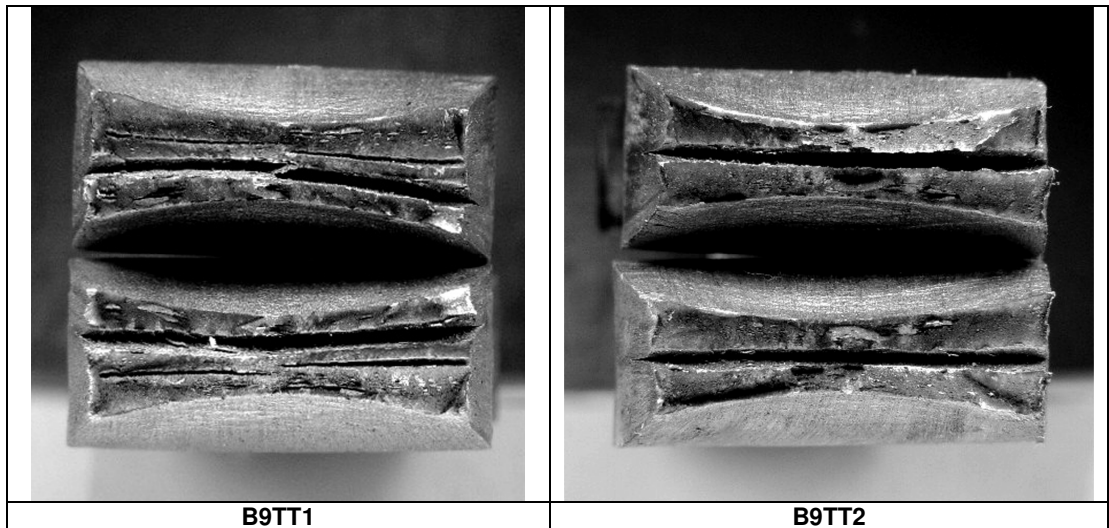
Fractographs of B9TT1 and B9TT2 specimens.
